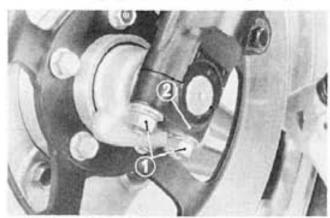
(1) Axle holder nut (2) Axle holder
